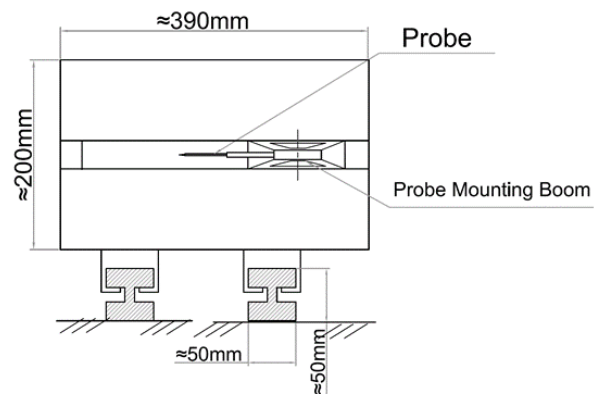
Side View of the mechanism mounted on rails with approximate dimensions
